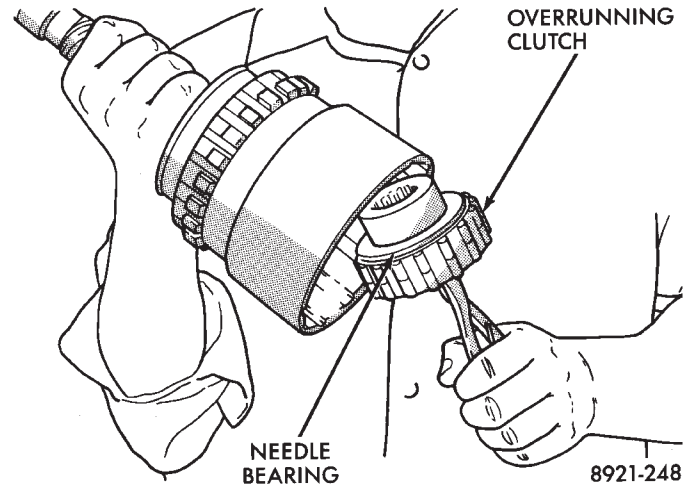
Overrunning Clutch Assembly Removal/Installation
